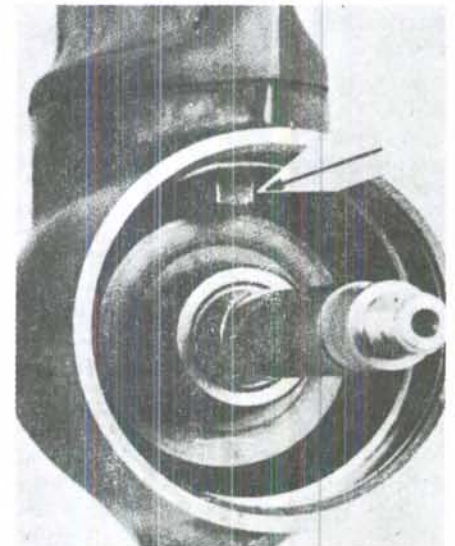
Lower unit gearcase with propeller shaft bearing cage removed, showing location of rear stud nut (53—Fig. C2-14).
